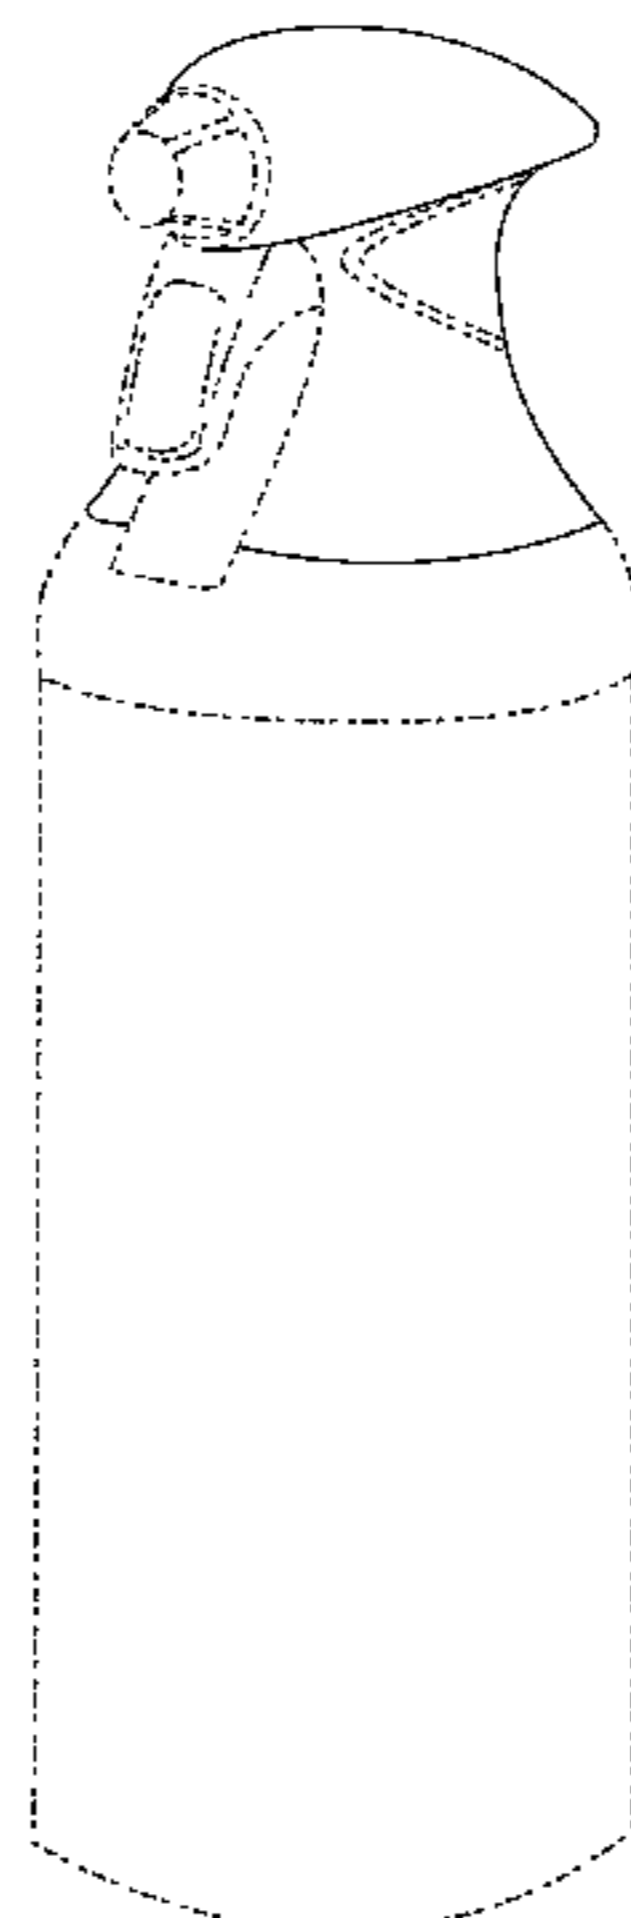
is a side view of the trigger sprayer shown in FIG. 1;
